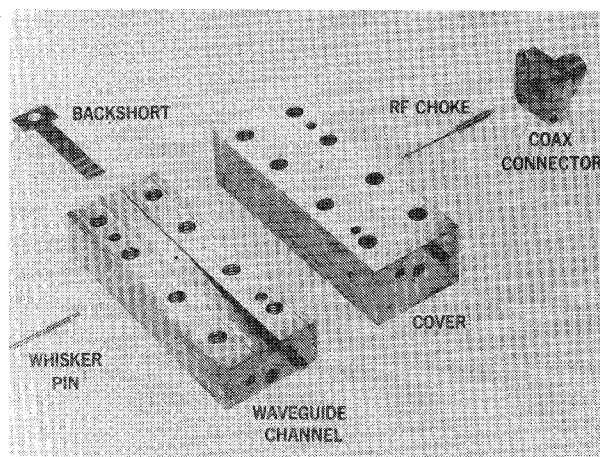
Photograph of a mixer block with associated components. The waveguide channel with a linear taper is milled into the block shown in the lower left part of the figure.
